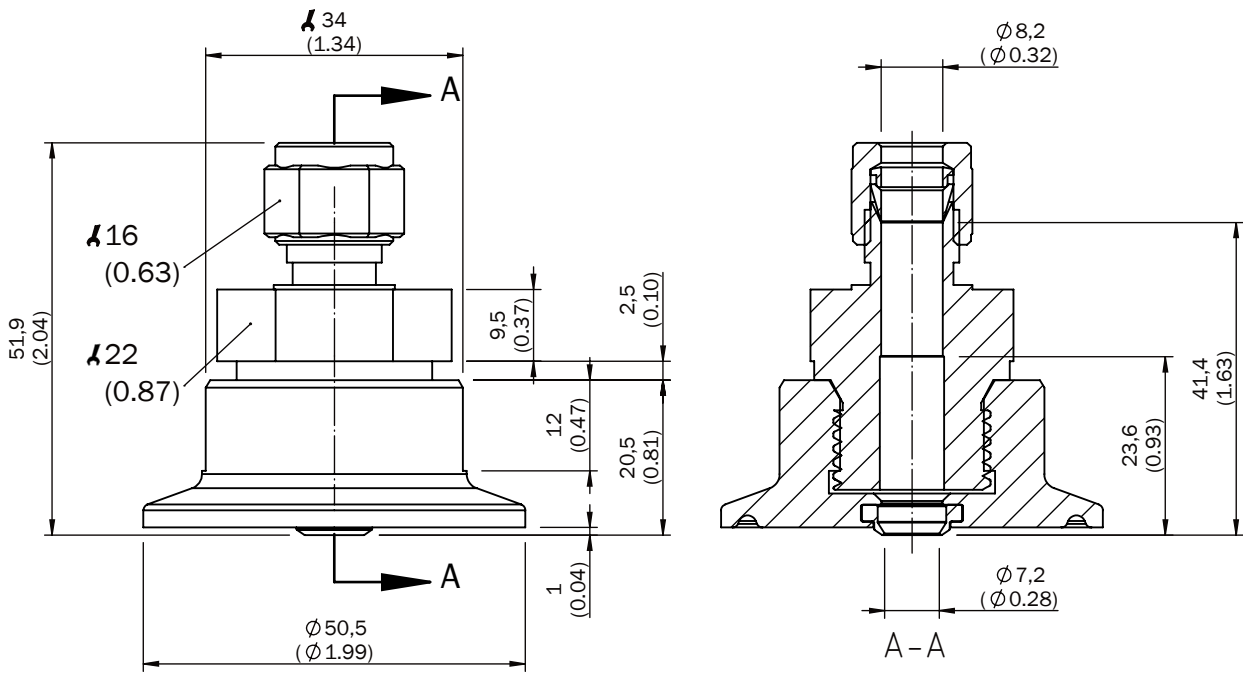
Dimensional drawing adapter clamp DIN32676 DN25-40 (p/n 2093548)
